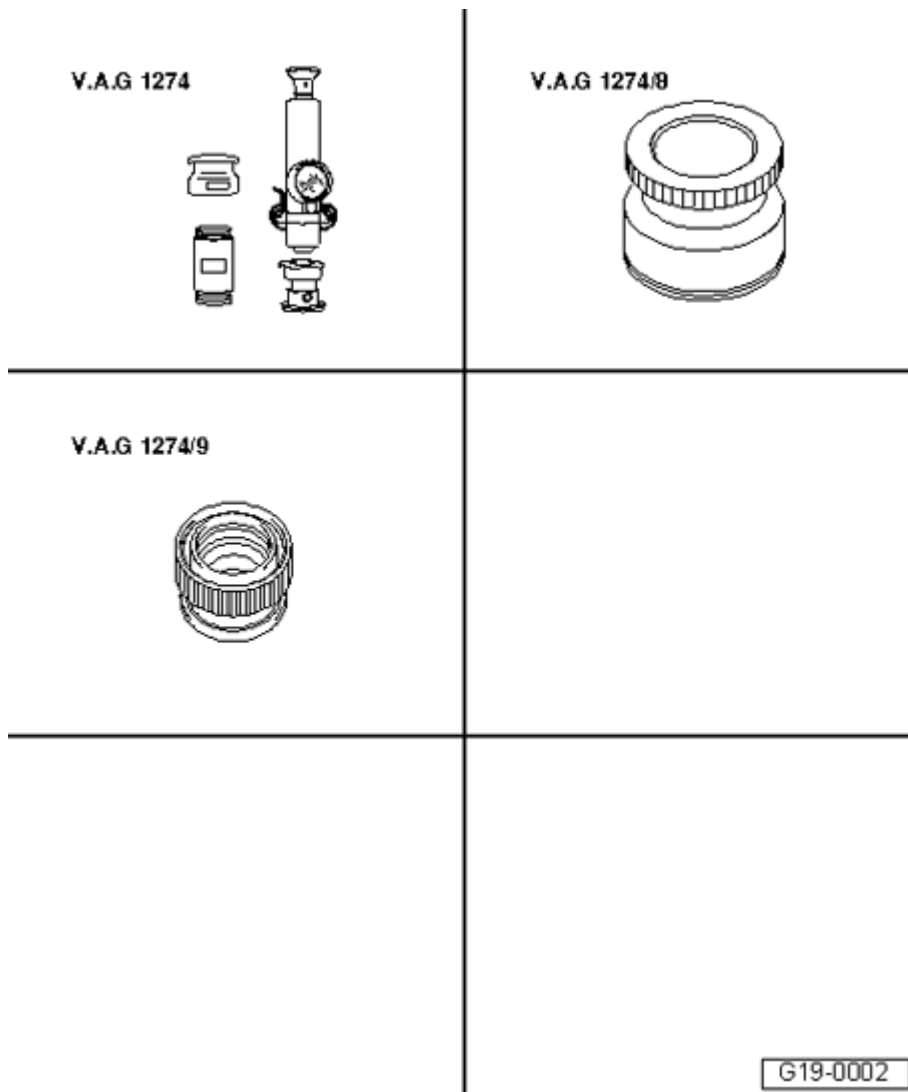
Identifying Special Tools - Cooling System, Checking For Leaks
